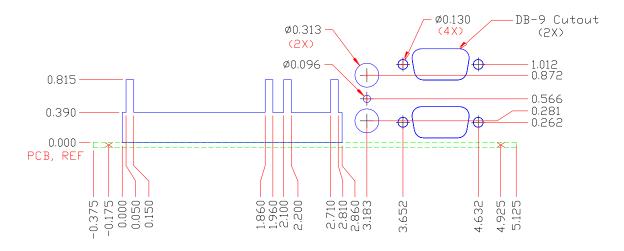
CBL/CBR-8004 Dimensions and Mounting
